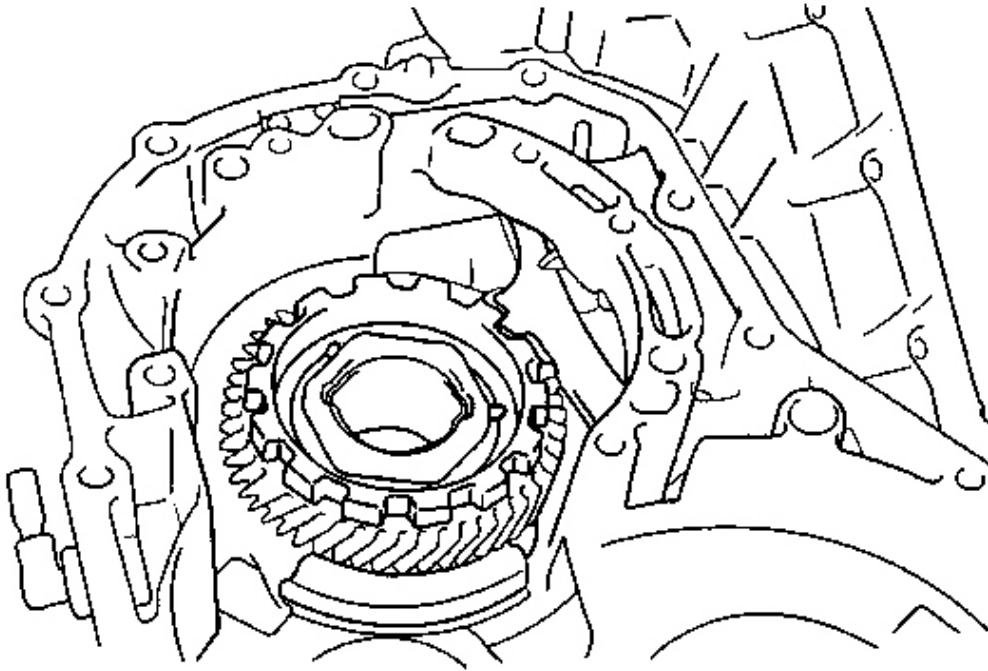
Counter Drive Gear & Parking Lock Pawl
